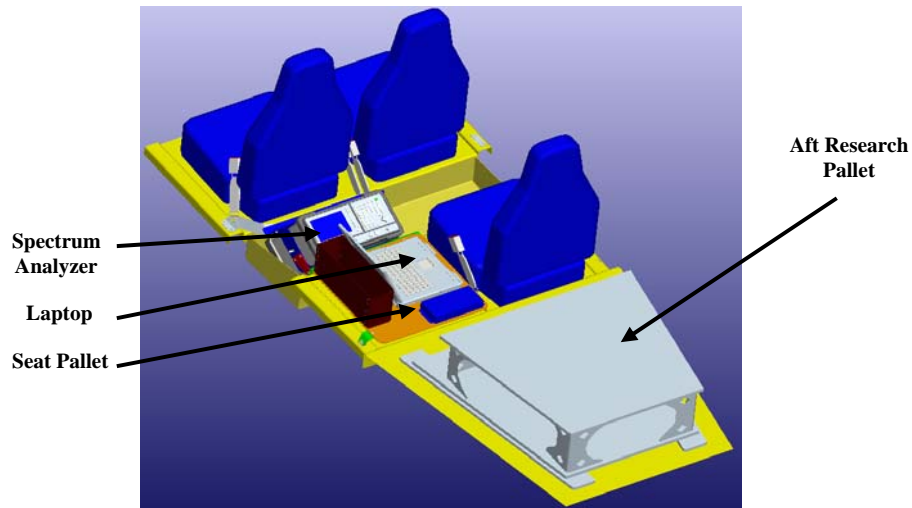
ARMS and aft pallet design layout in Lancair aircraft.
